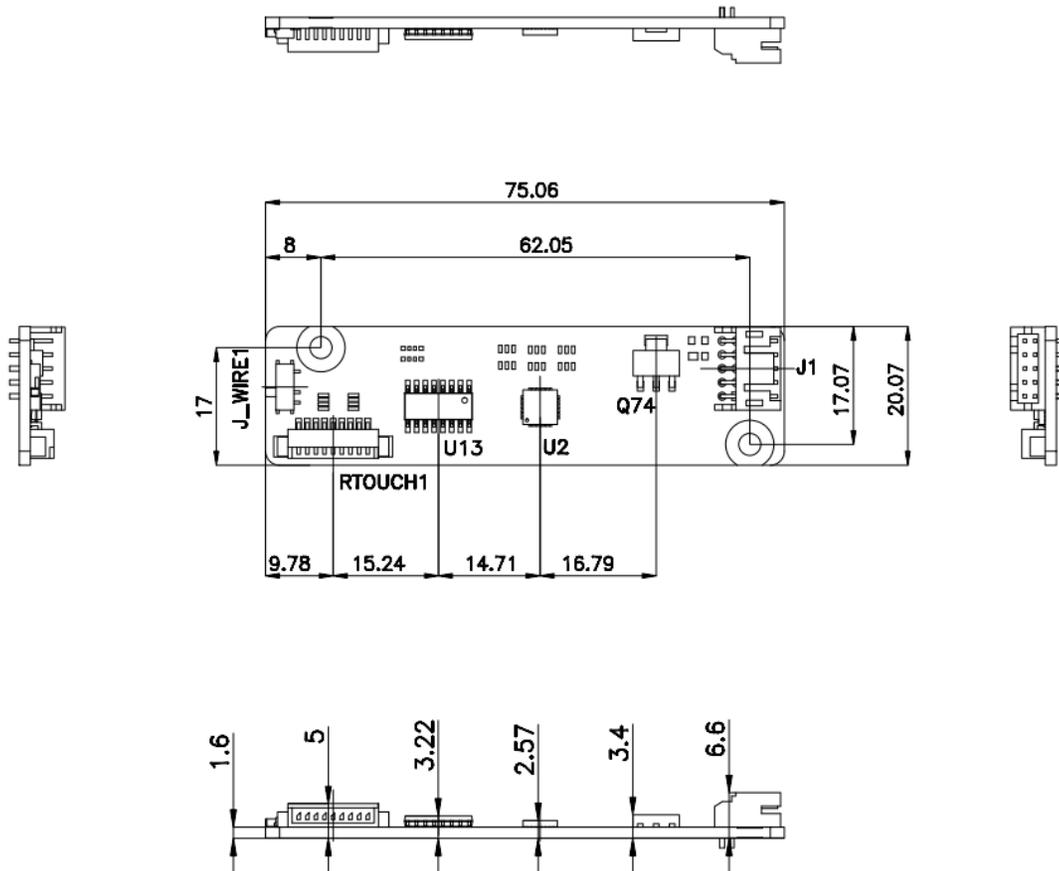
TOUCH-PM6000 Dimensions (mm)
